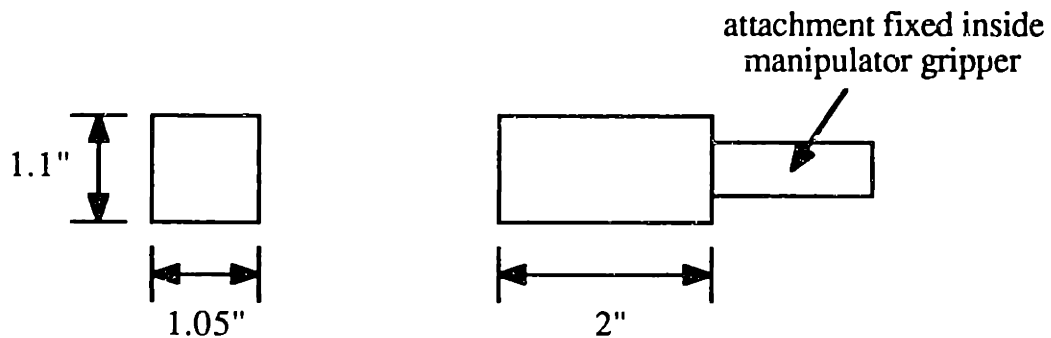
Dimensions of the Peg Used for the Peg-In-Hole Experiments Front View (shown on left) and Side View (shown on right)
